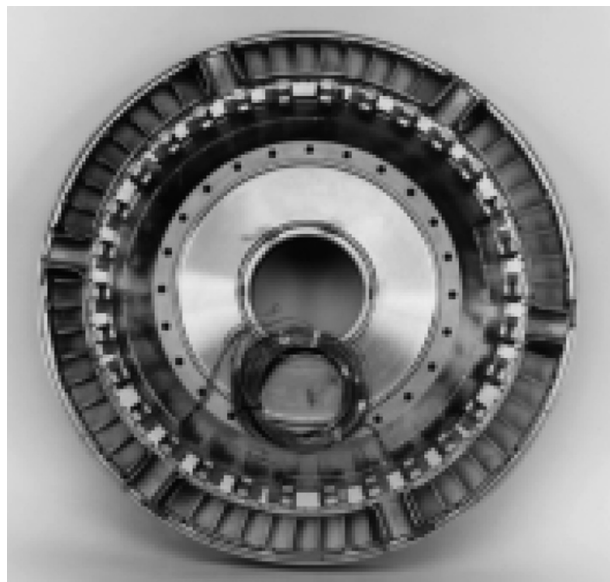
Ceramic vane/mount assembly [15-4].
